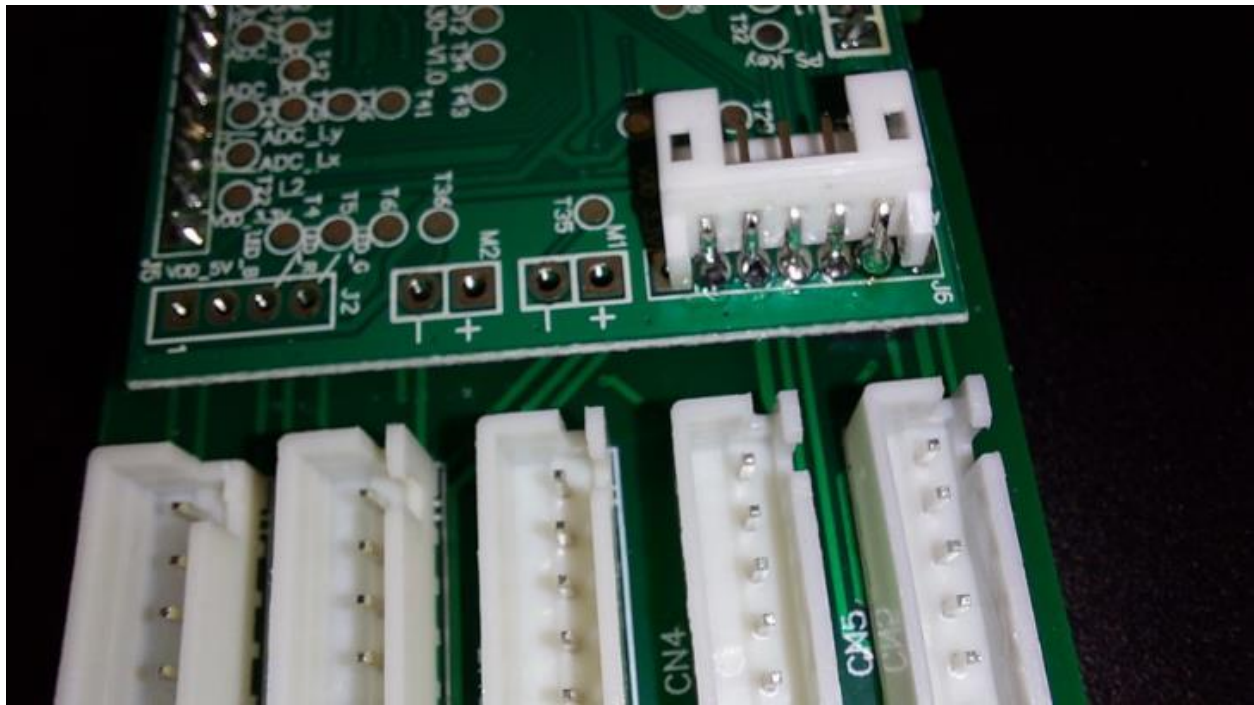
Figure D – The first 4 pins of the JST-PH5 are soldered to the Hit Box PCB
